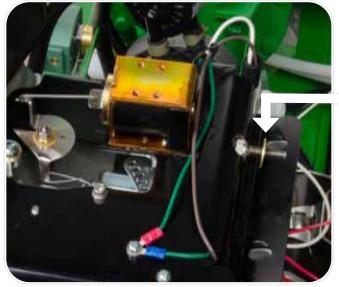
ENGINE ASSEMBLY (TOP COVER REMOVED)
